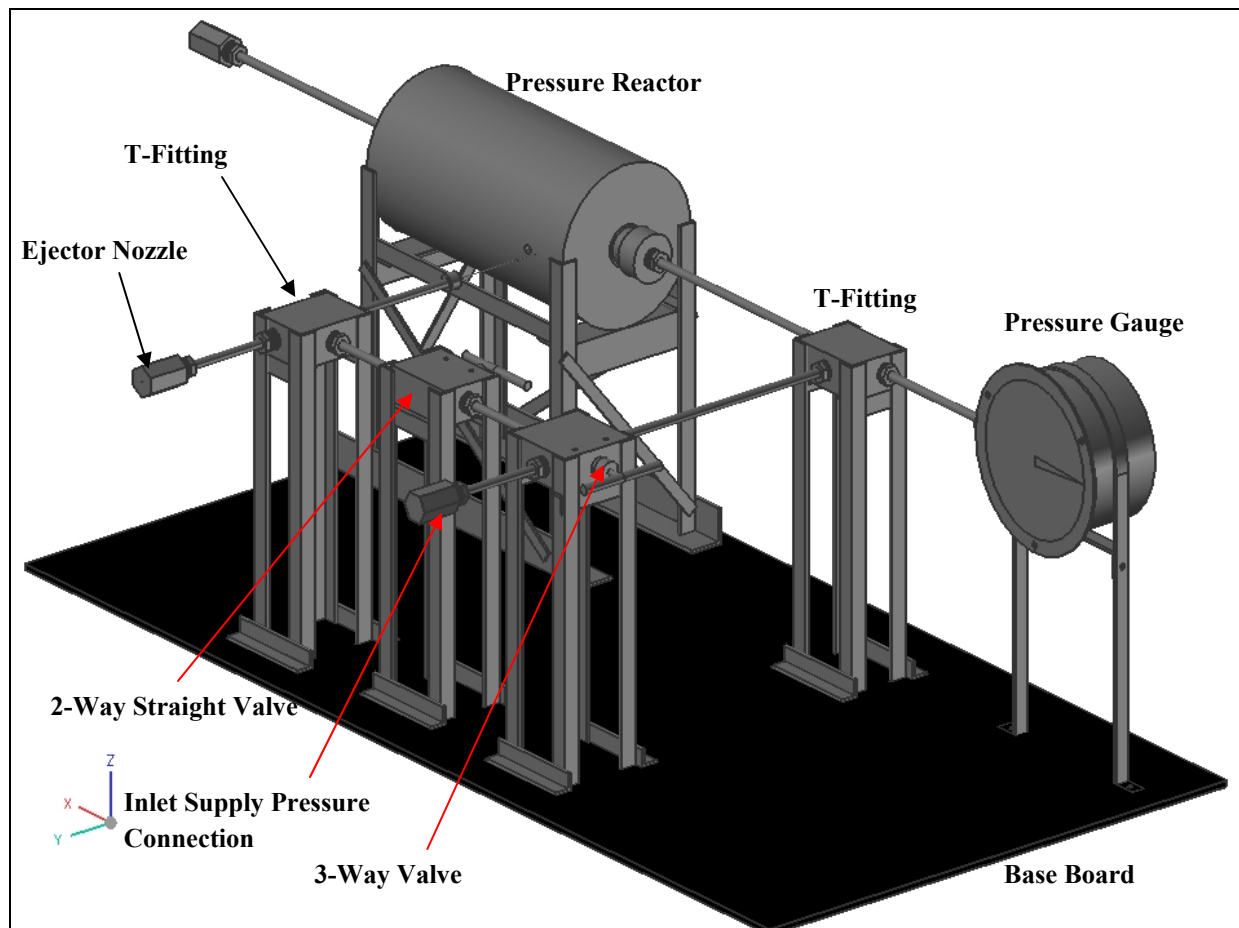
CAD Figure of the Pressurized Gas Generation Assembly with Isometric View.
